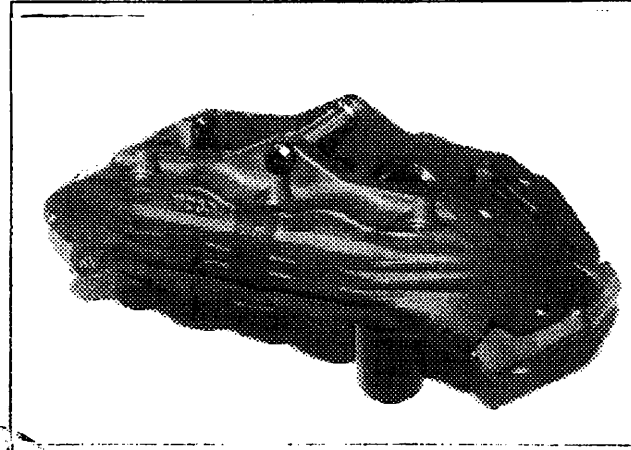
FRONT AND/OR REAR BRAKE CALIPER
